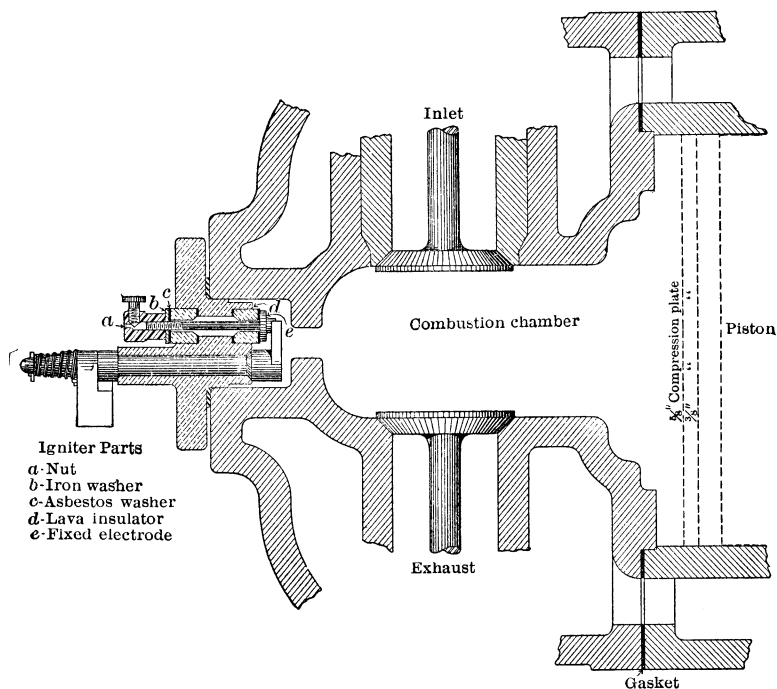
Longitudinal section through combustion chamber and igniter of Otto alcohol engine.
